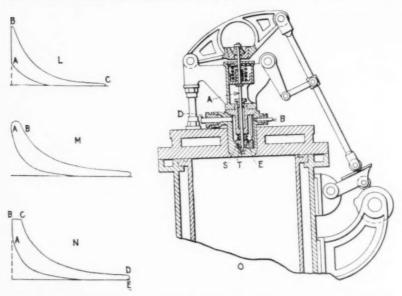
L, M, N Diagrams of Various Types of Internal-Combustion · Engines O Tappet Gear of the Sabathe Engine
